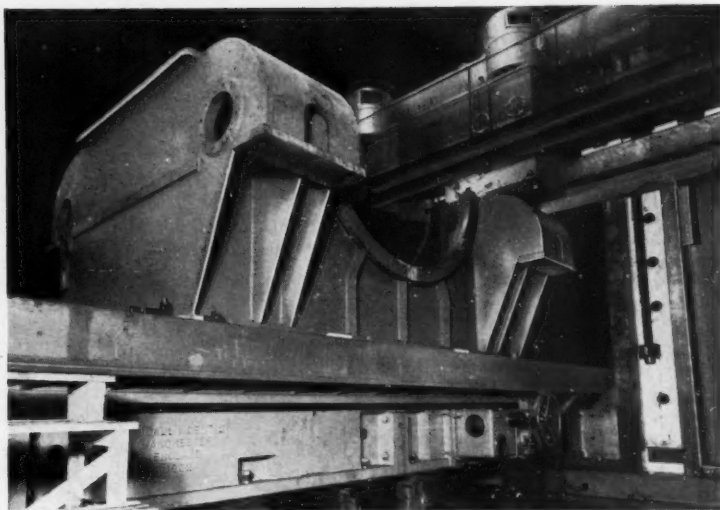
Right-hand Side View of the Large Kendall & Gent Planomilling Machine
